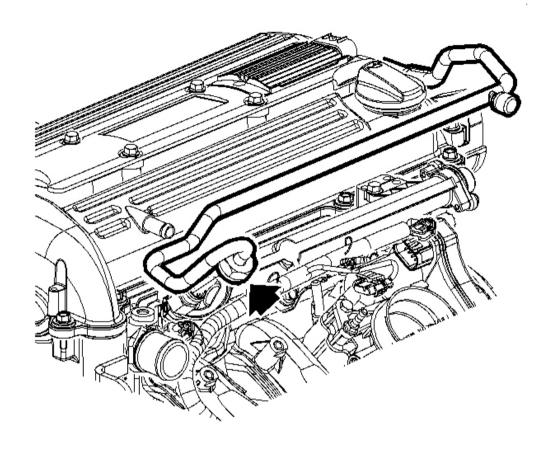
Positioning The Fuel Transfer Line Assembly Courtesy of GENERAL MOTORS CORP.
